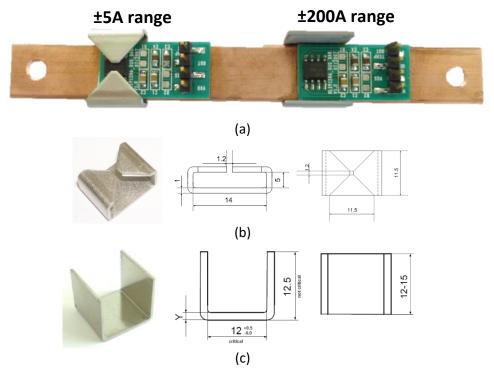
(a) Assembly. Images and sections for (b) closed shield and (c) U-shaped shield.
